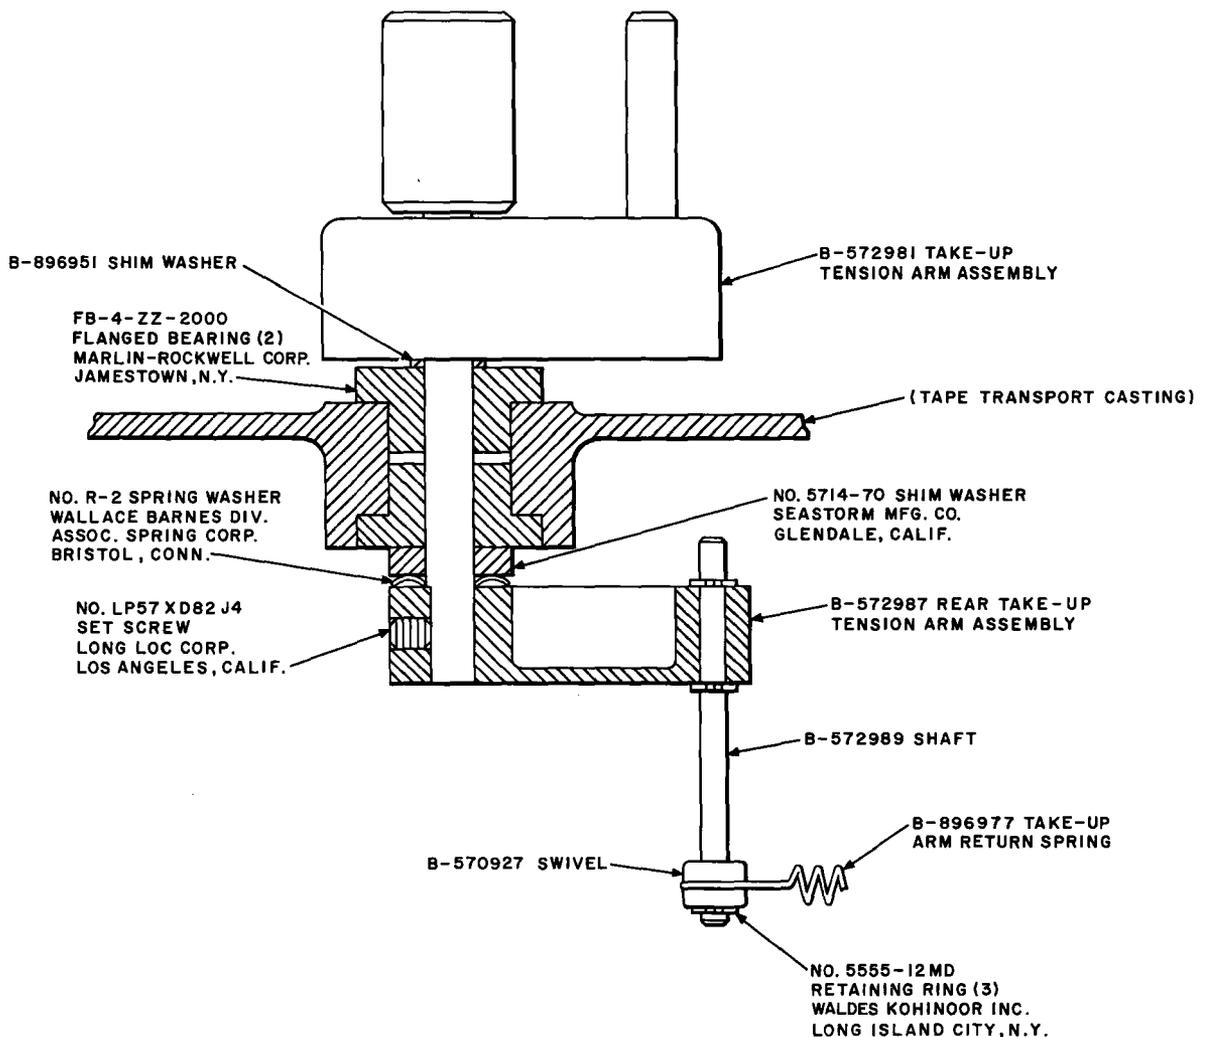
Sectional View of Take-Up Tension Arm Assembly — KS-19125, List 2 Recorder
